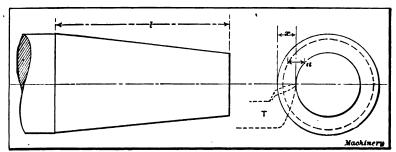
Tool Point should be in same Horizontal Plane as Axis of Work for Taper Turning
